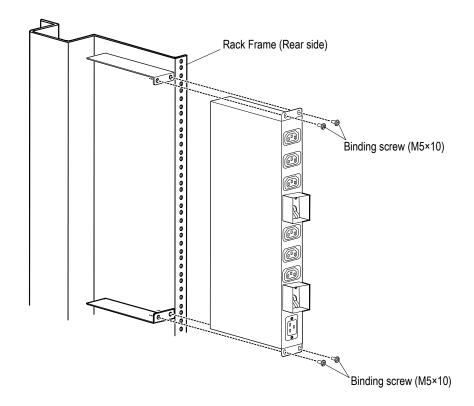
Installing the PDB (A-F6516-PDU6)
